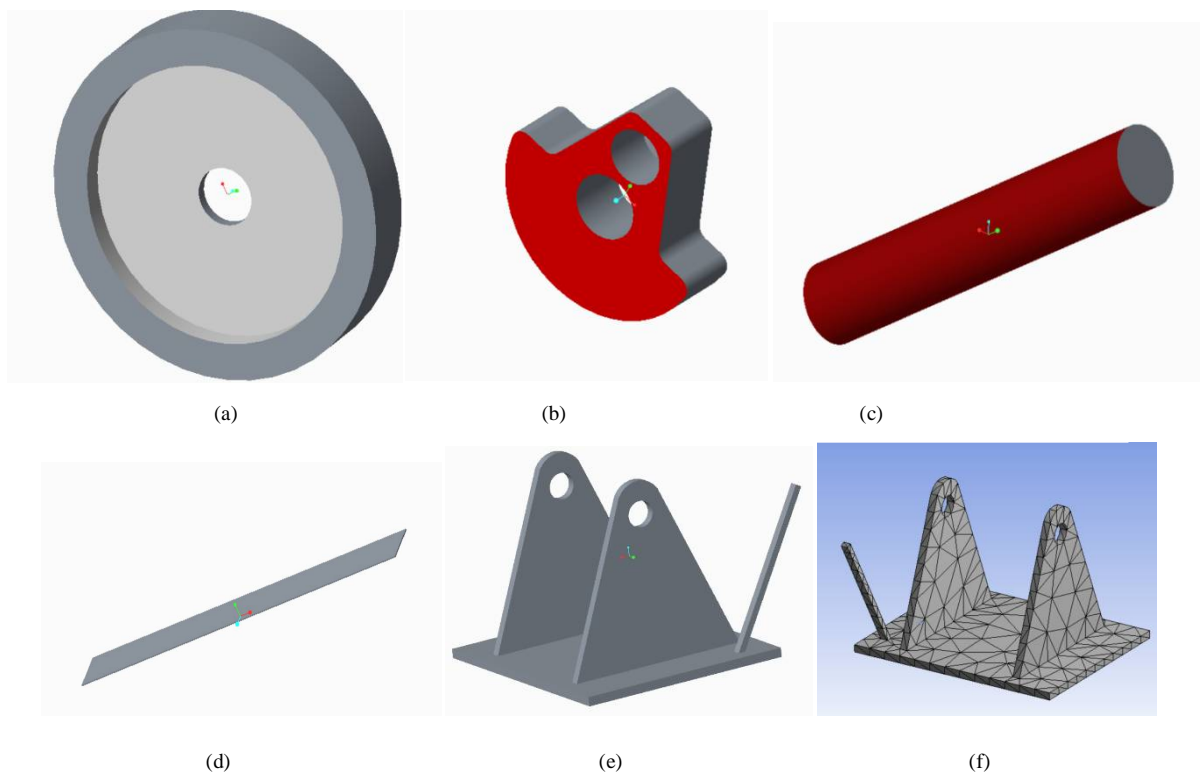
Selection of components (a) CAD model of flywheel (b) CAD model of balancing weight (c) CAD model of shaft (d) CAD model of spiral spring (e) CAD model of base(f) Mesh model of base
